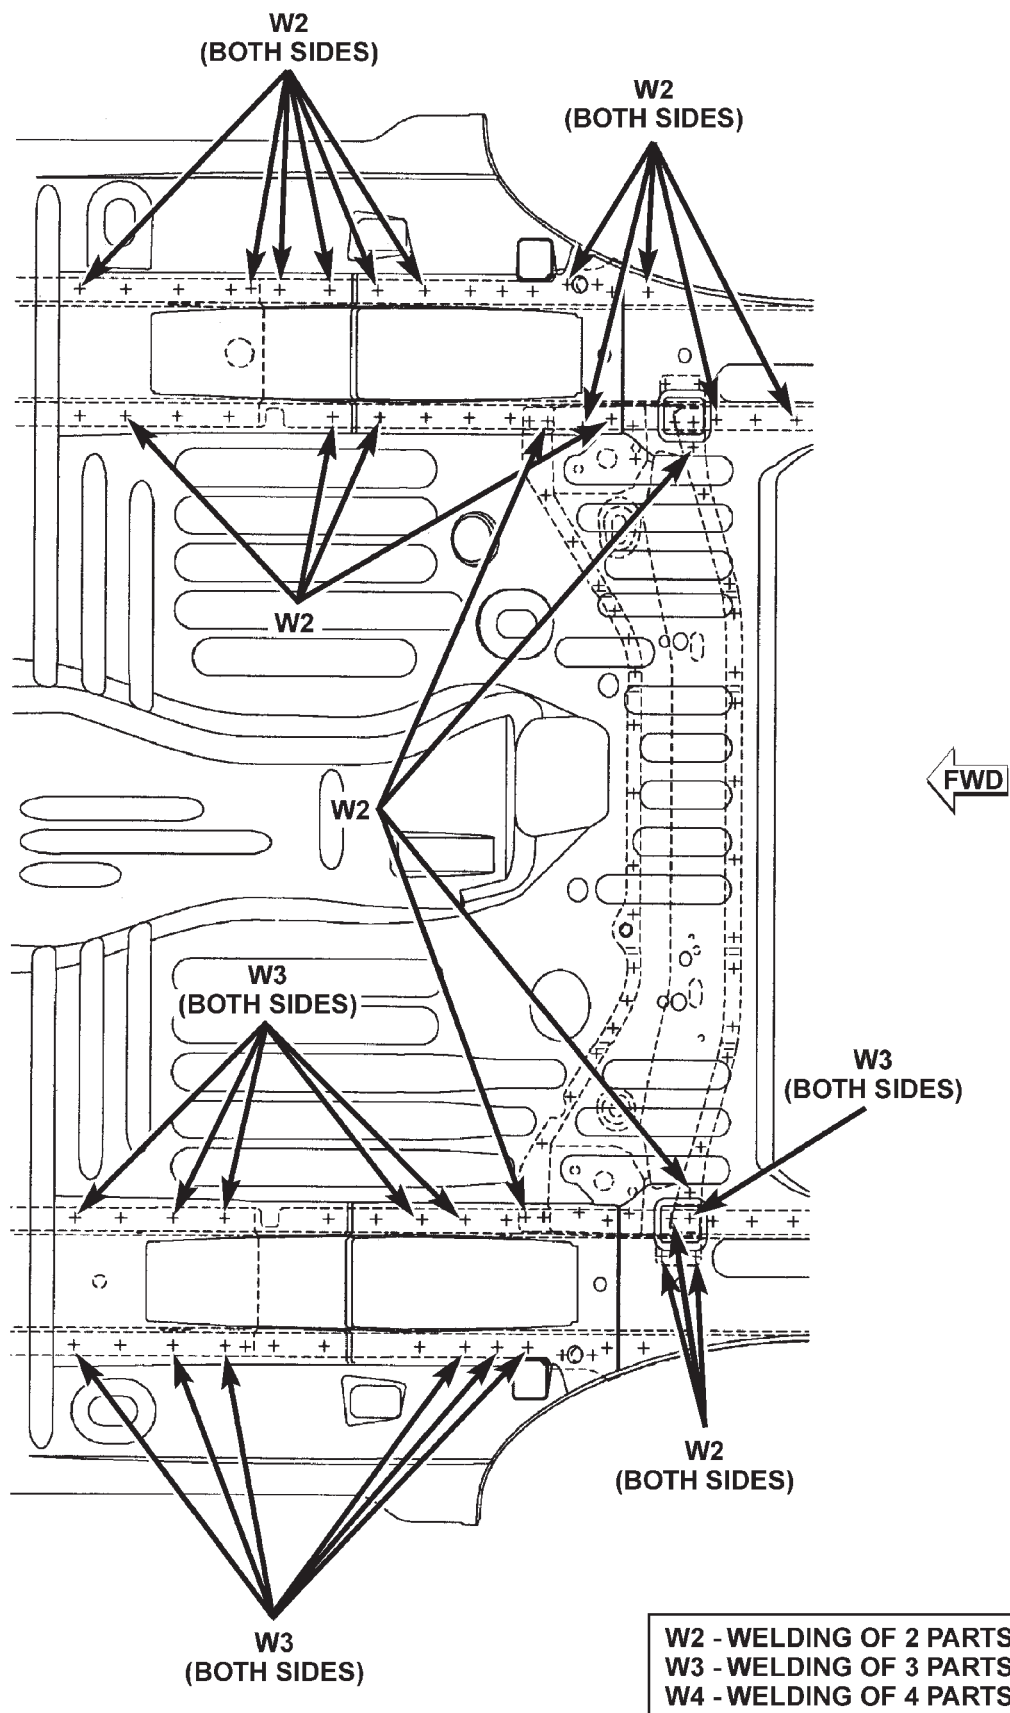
FRONT FLOOR PAN TO FRONT SEAT REINFORCEMENT AND RAILS
